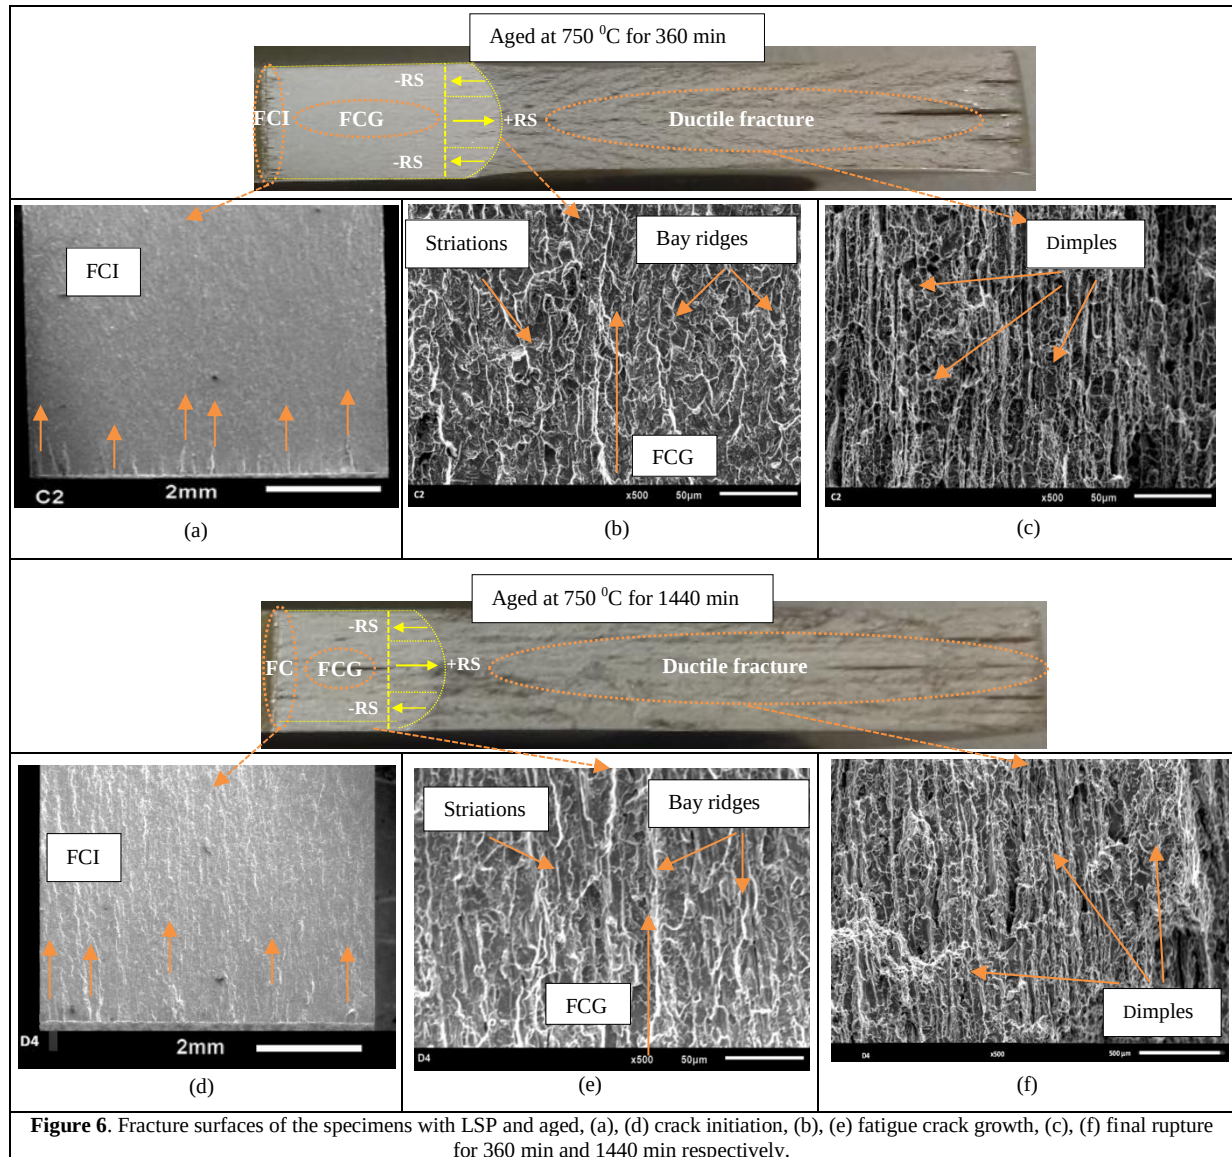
Fracture surfaces of the specimens with LSP and aged, (a), (d) crack initiation, (b), (e) fatigue crack growth, (c), (f) final rupture for 360 min and 1440 min respectively.
